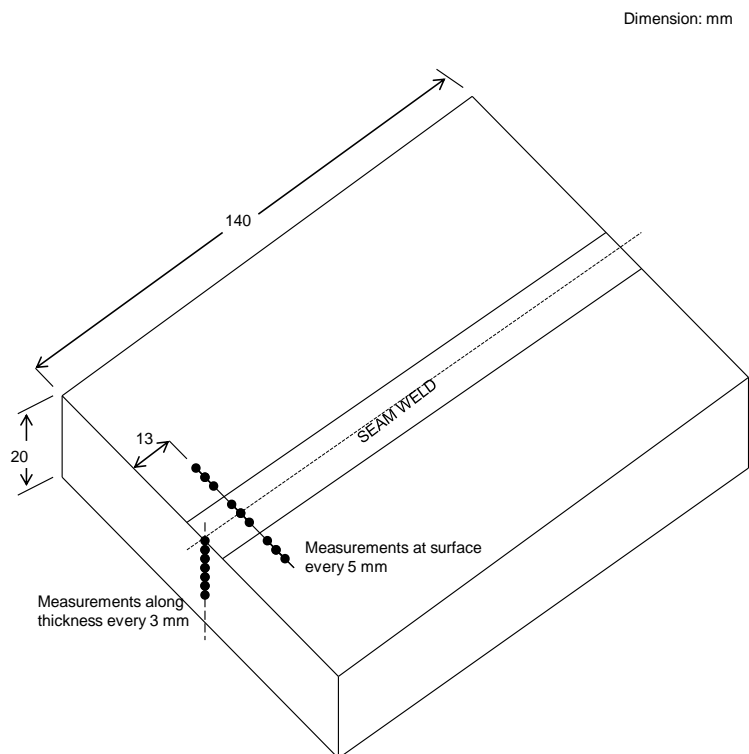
Measurement locations in plate cut by abrasive disk. Were removed 3 mm of material from the plate thickness: 2.5 mm by abrasive disk cutting and –afterwards- 0.5 mm by grinding and polishing processes.
